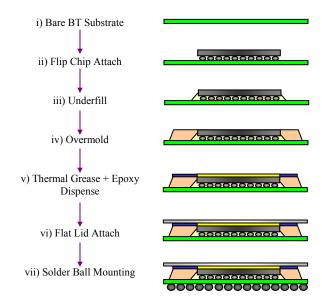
Assembly Flow for the "XP-fcBGA" Package.
